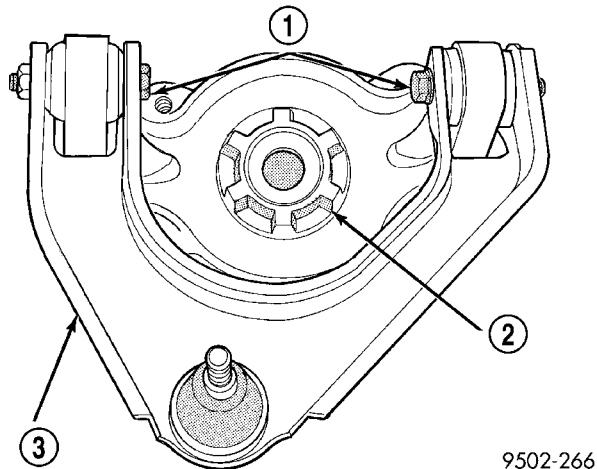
Upper Control Arm To Mounting Bracket Attachment
